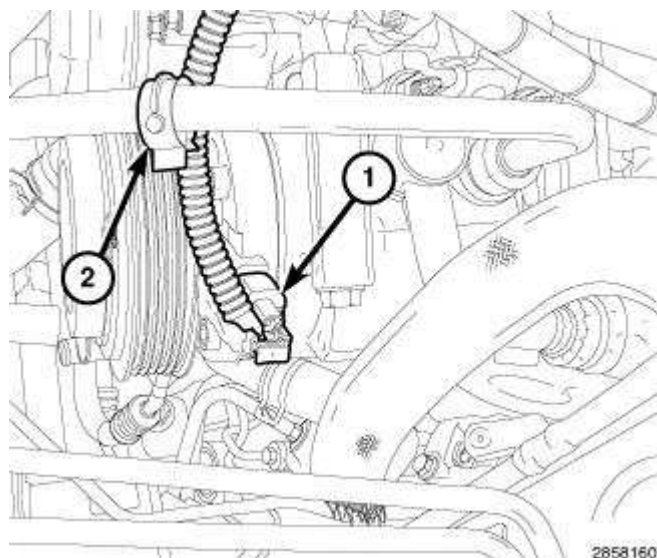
A/C Compressor Electrical Connector & Wire Harness Retainer
